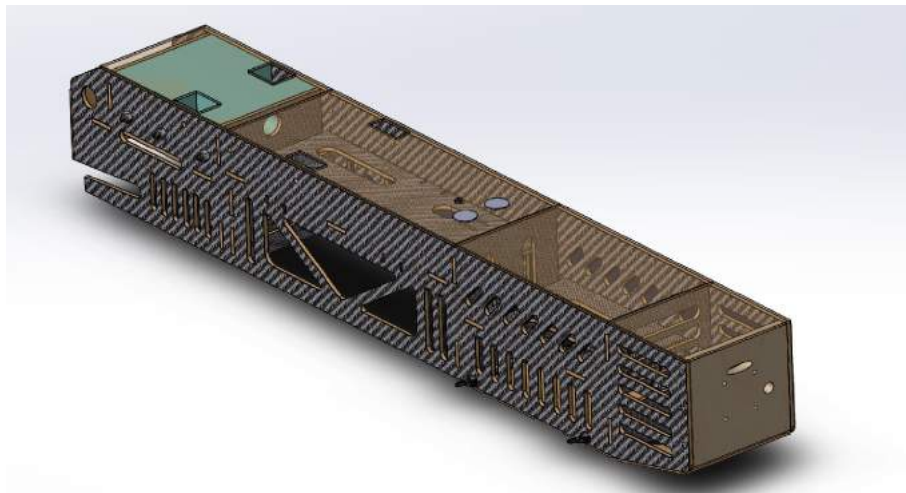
SolidWorks CAD render of the fuselage with bulkheads and side panels showing
